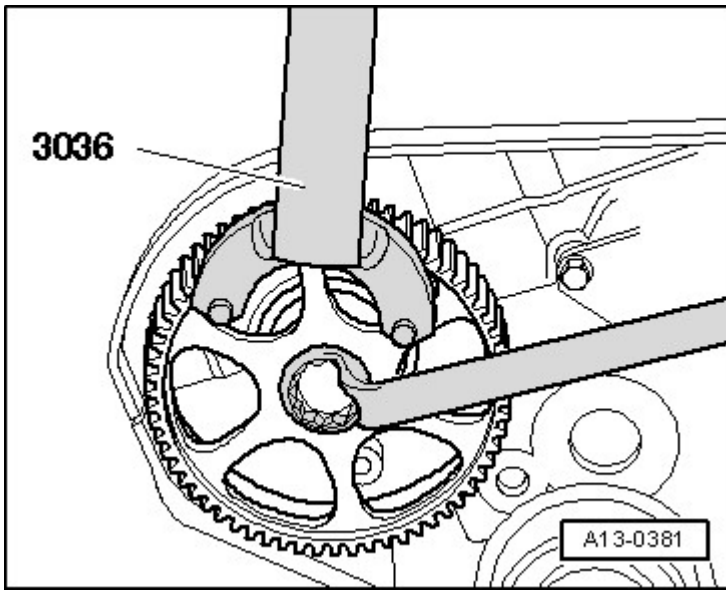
Counterholding Camshaft Gear Using 3036 Retainer
